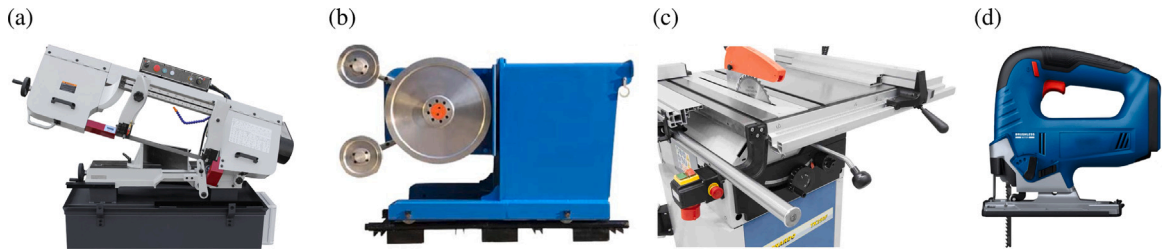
Different sawing machines. (a) Band sawing machine; (b) Wire sawing machine; (c) Circular table sawing machine; (d) Handheld jigsaw power tool.
